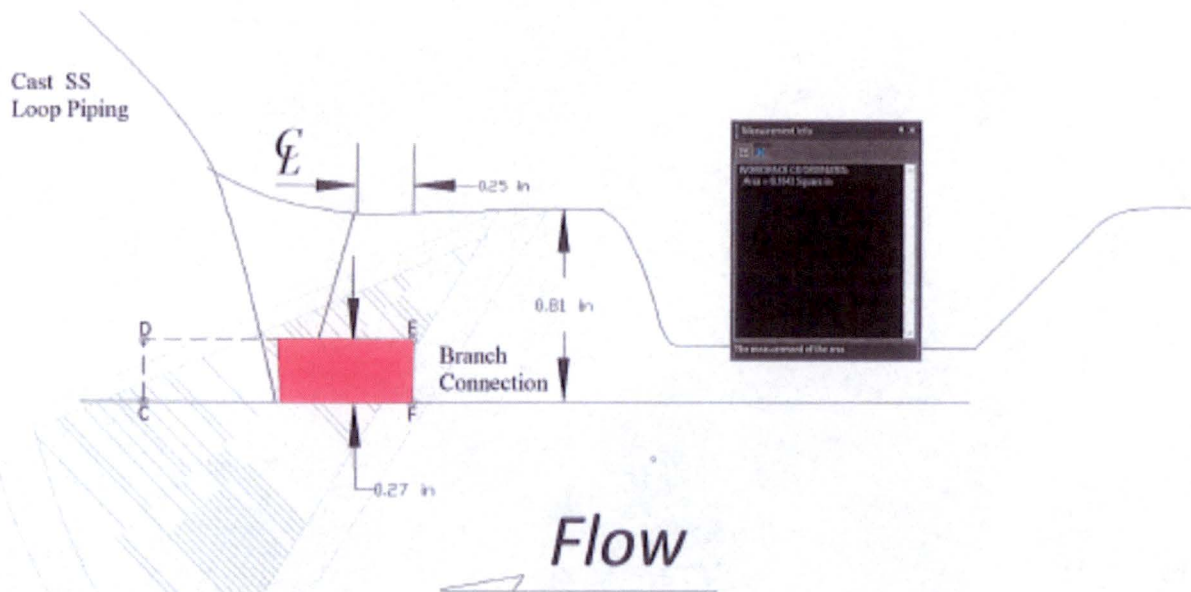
Weld 1-RC-1-14N (Extracted from Reference DRAWING A-9)
